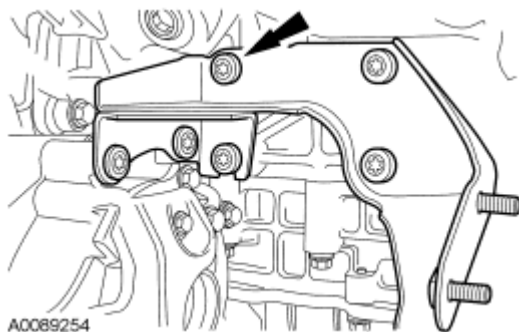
Locating Half Shaft Support Bracket & Bolts
